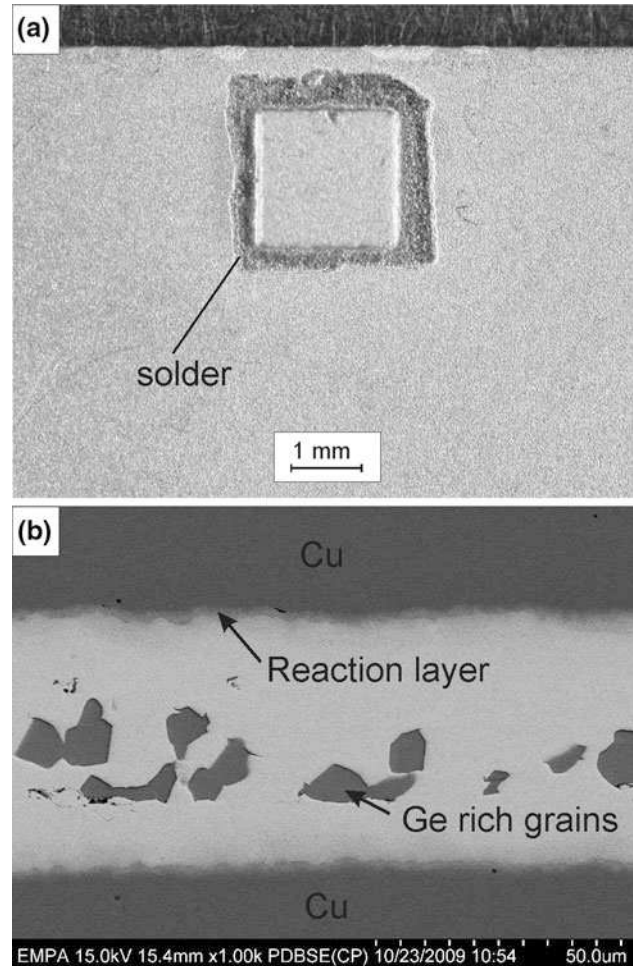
(a) Top view of Cu-Cu solder joints and (b) SEM cross-section of interface microstructure of Cu-Cu solder joints.
